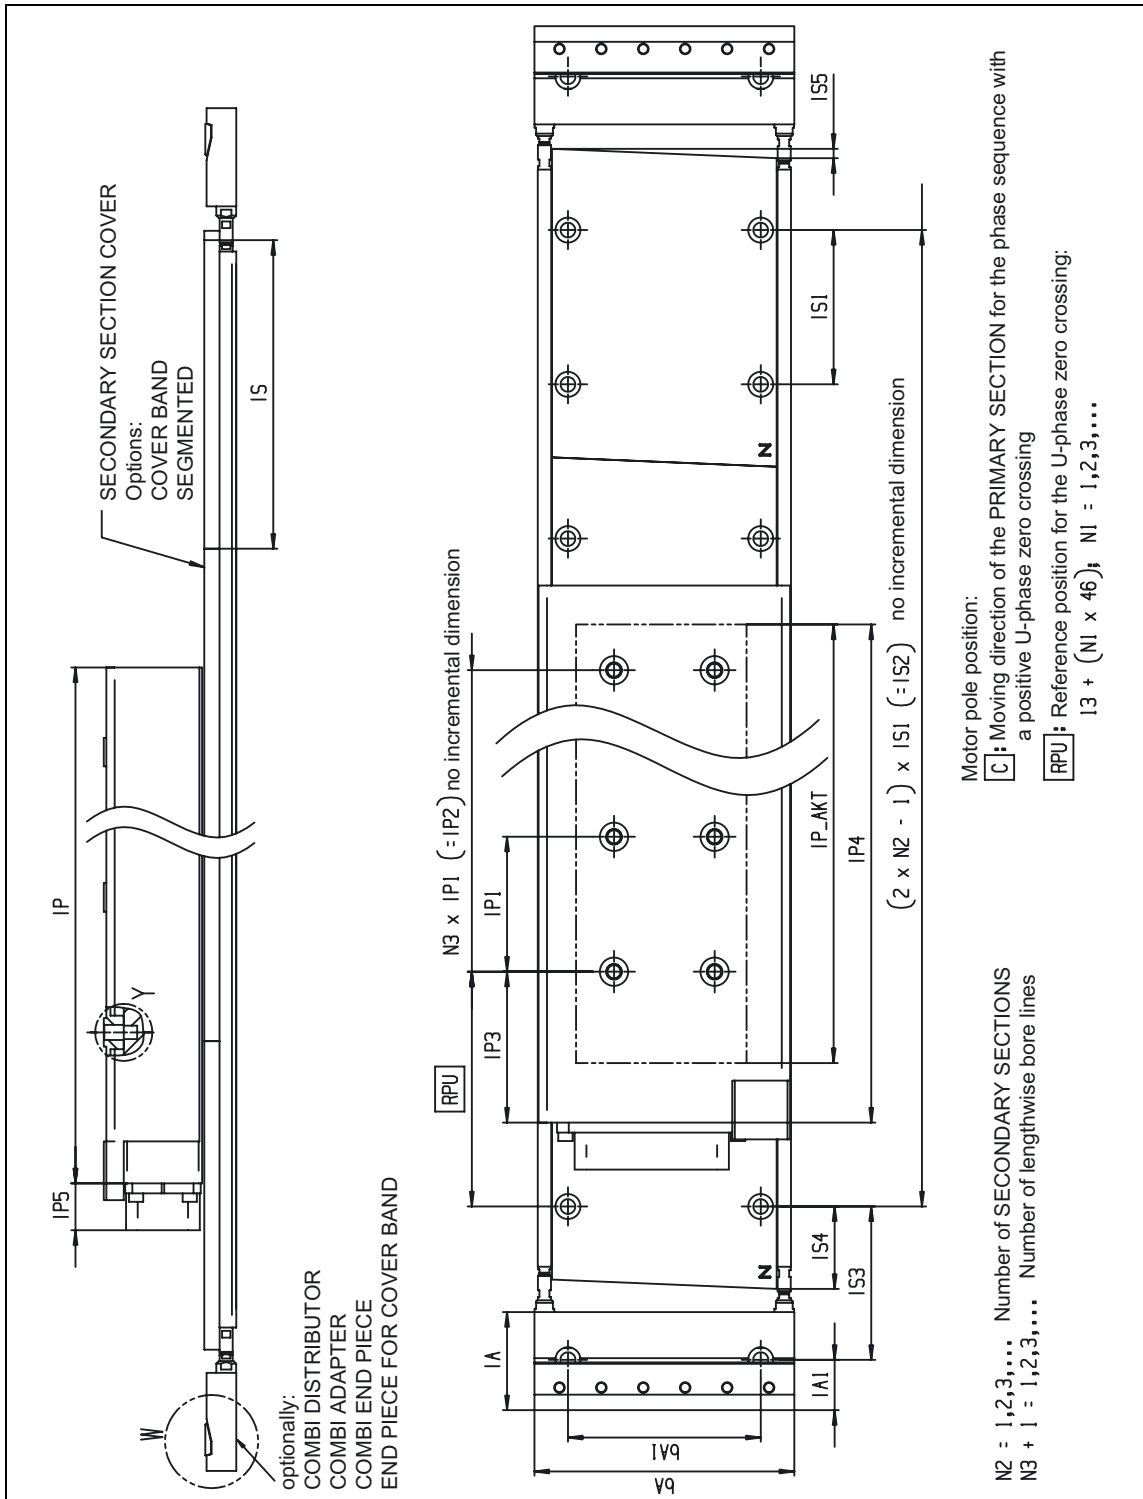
Mounting dimensions for the 1FN3300-3WG00, 1FN3450-3WE00, 1FN3450-4WE00 motor models
